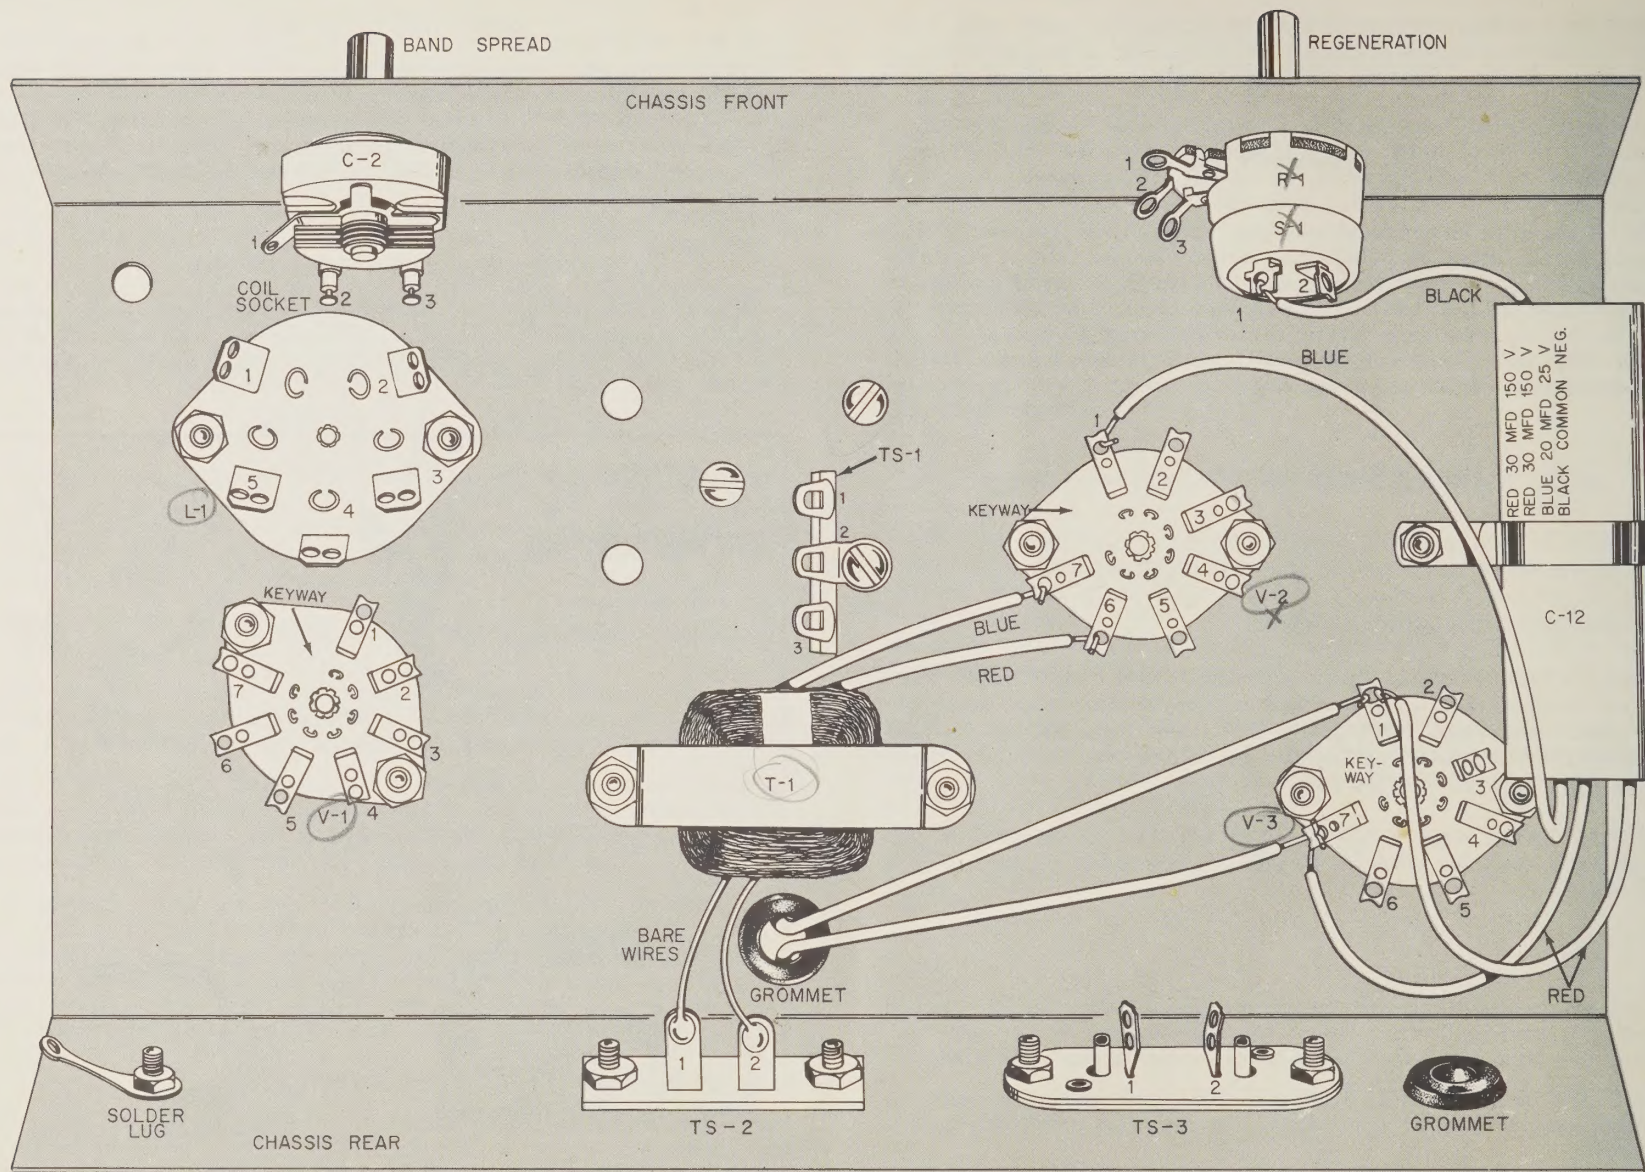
PARTS MOUNTING AND FIRST WIRING
